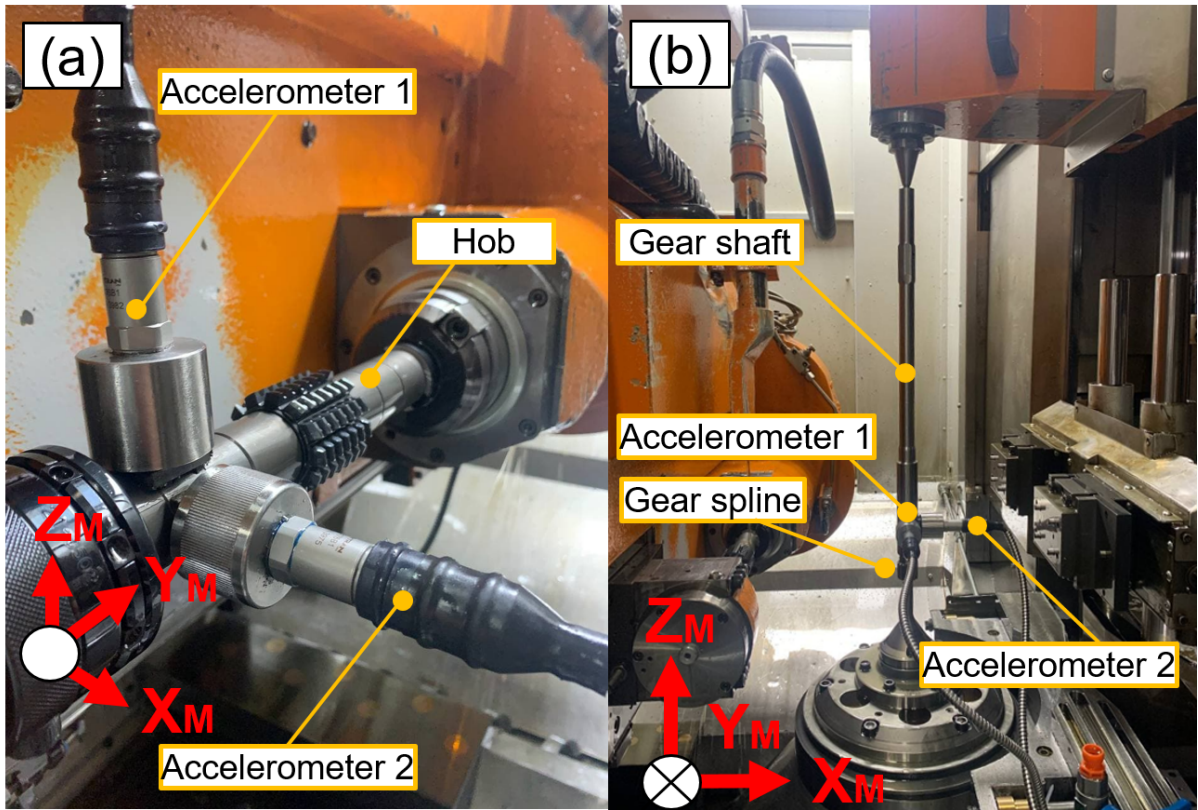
Impact hammer testing on a) hob and b) gear structure (Setup II)
